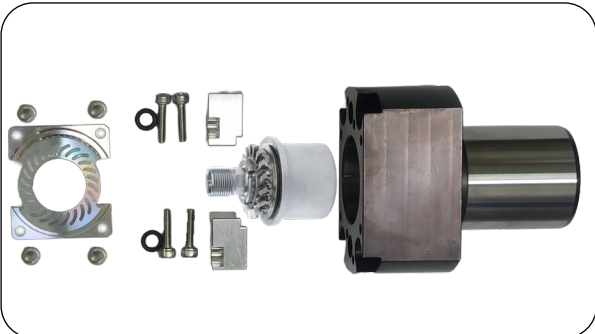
SWISS JET Spindle taken apart for Cartridge replacement
